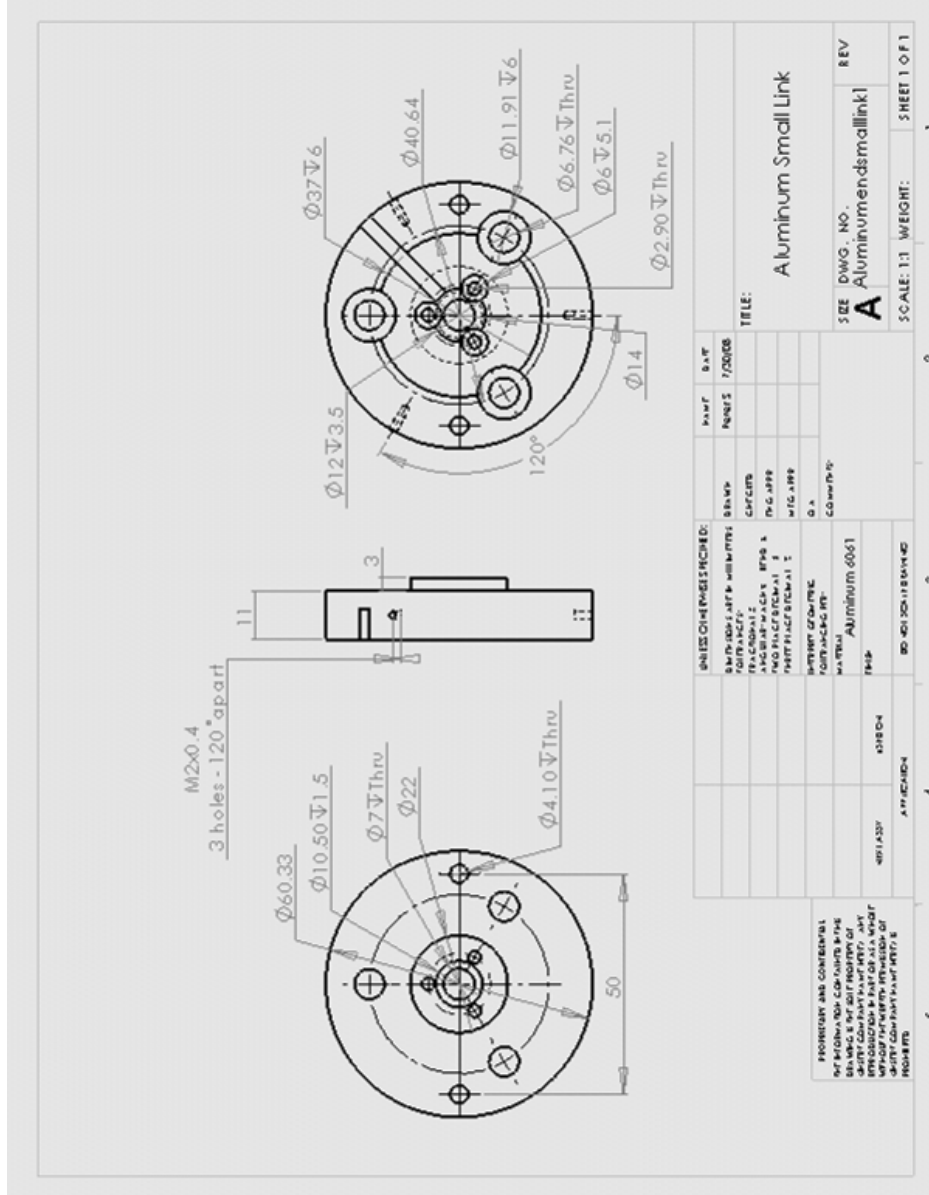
Aluminum End of Small Link Front, Side, and Back View
